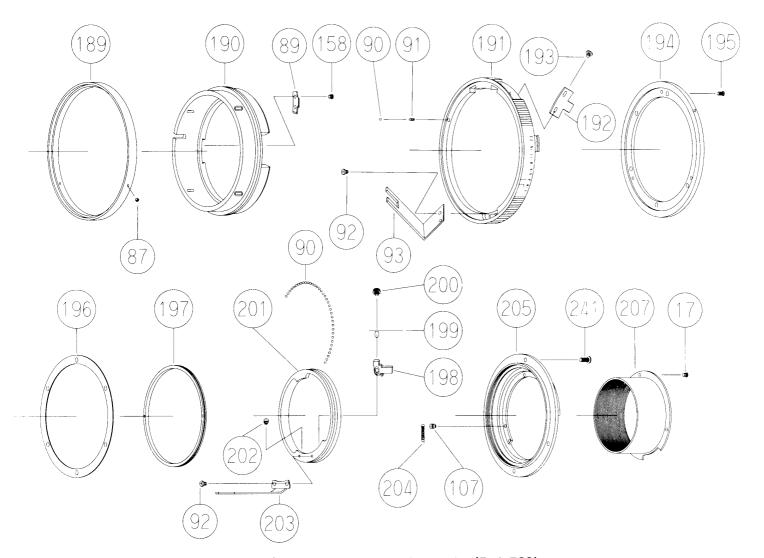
Minolta Mount Assembly (Ref. 528)
